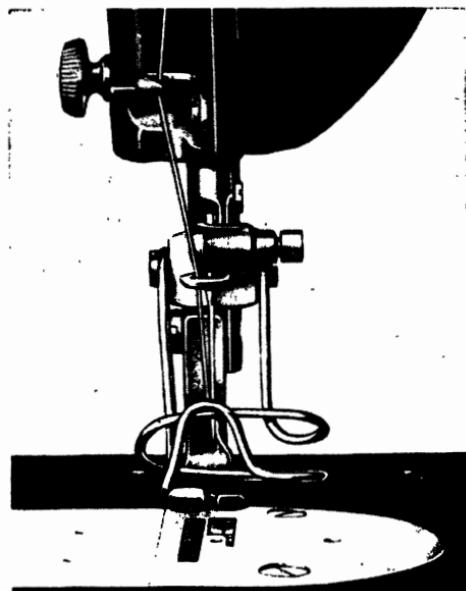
A sewing machine with barrier guard for the needle. (*Courtesy of the Singer Sewing Machine Company.*)
